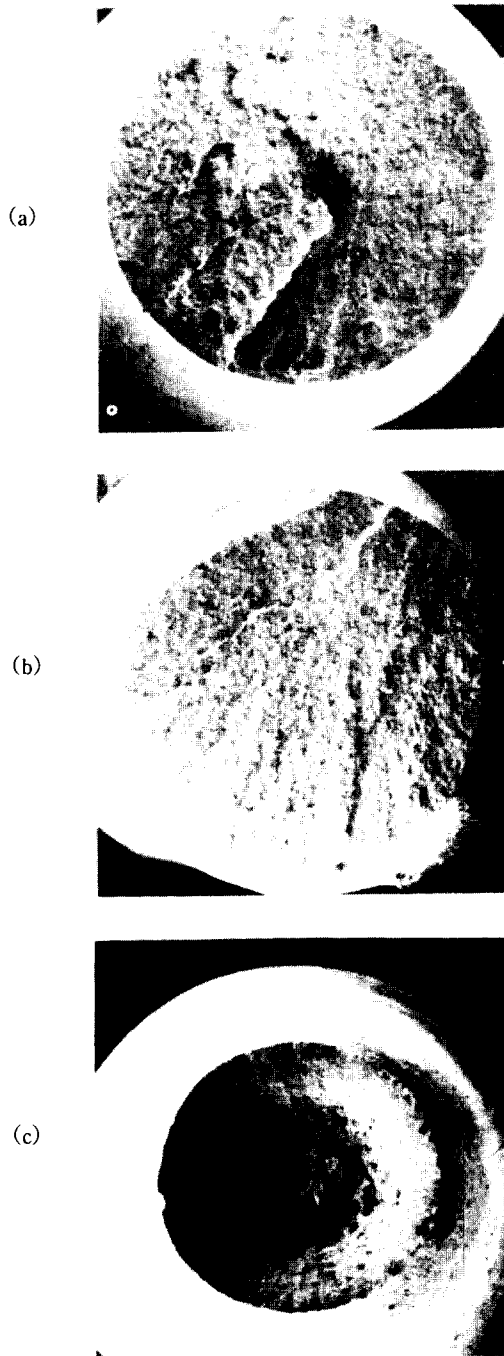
Macrofracture surface after SSRT in s.s.w.
